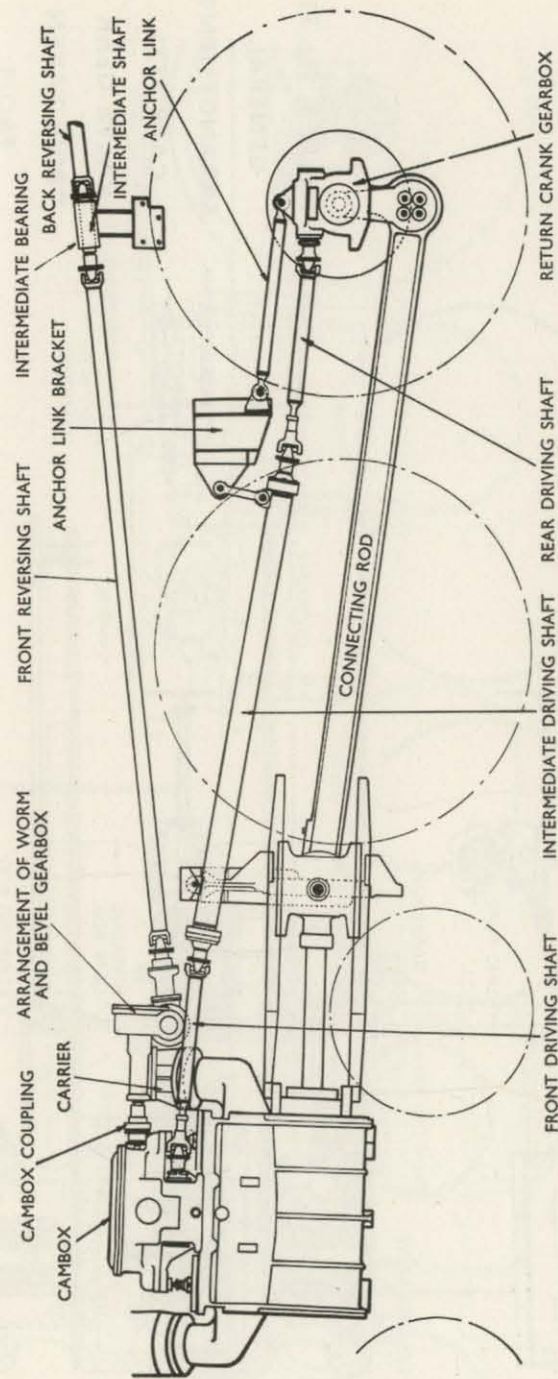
GENERAL ARRANGEMENT OF BRITISH CAPROTTI VALVE GEAR, OUTSIDE DRIVE
